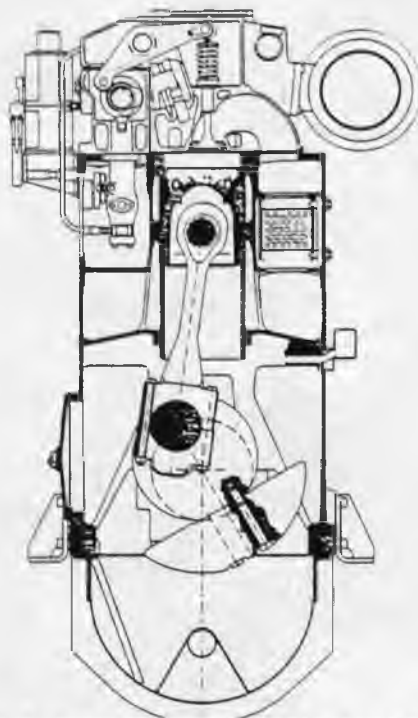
Cross-sectional view of L 20/27 in-line engine.
